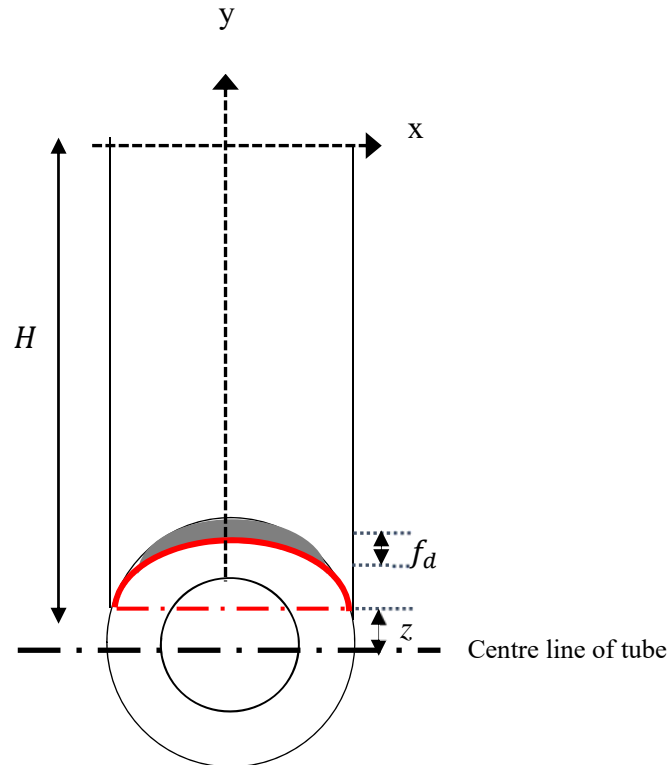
Schematic showing the modelling of an n-shaped or saddle shaped flawed tube - cross-section.
